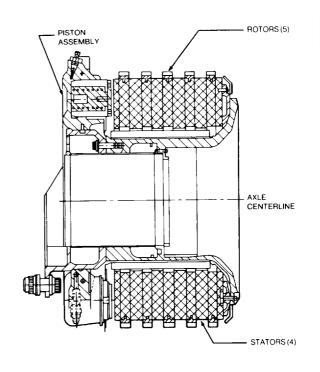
Future Main Landing Gear Carbon Brake Assembly
